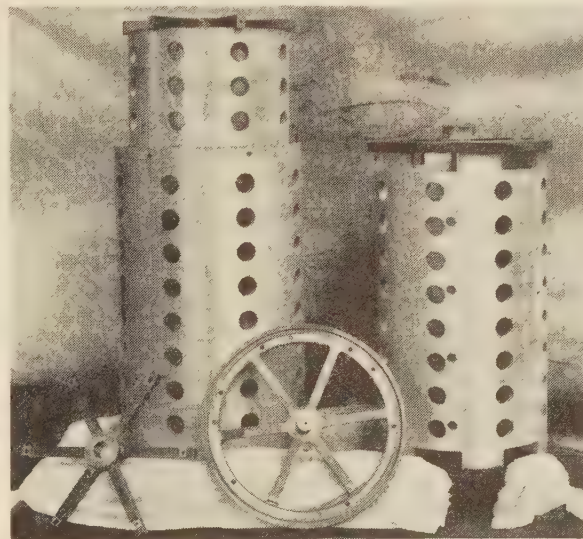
REMOVABLE PARTS OF MAIN THROTTLE VALVE
